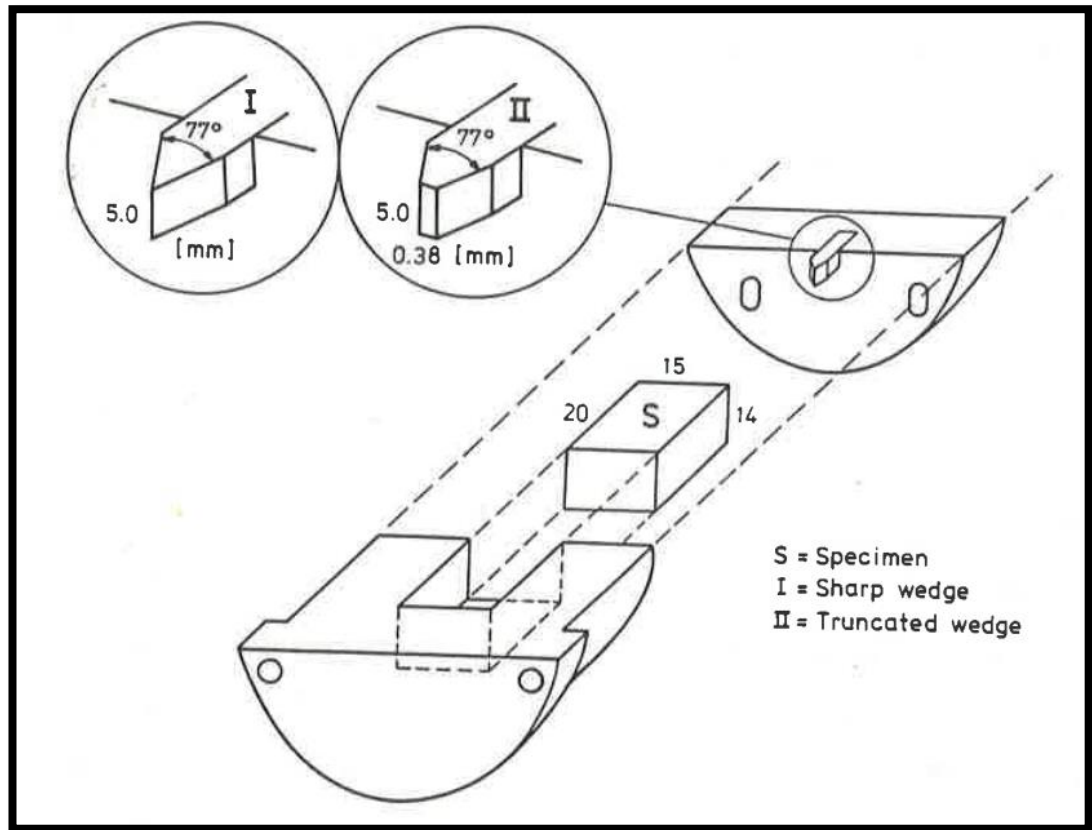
Exploded view of the indentation fixture (Lindqvist et al., 1984).
